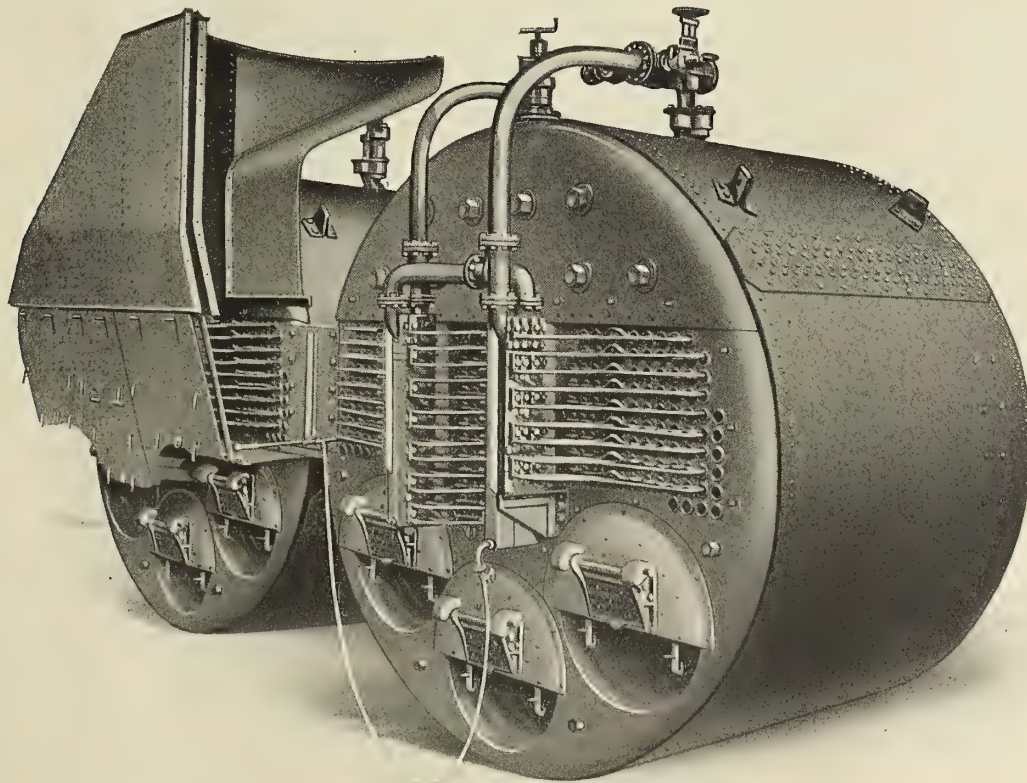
Schmidt Fire Tube Superheater Installed in an Internally Fired Marine Boiler
